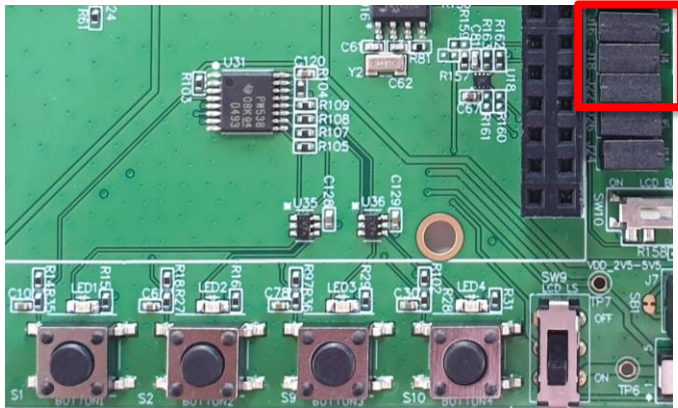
I2C device port expander chip (U31), LEDs, Buttons, jumpers (highlighted in red) schematic and PCB
